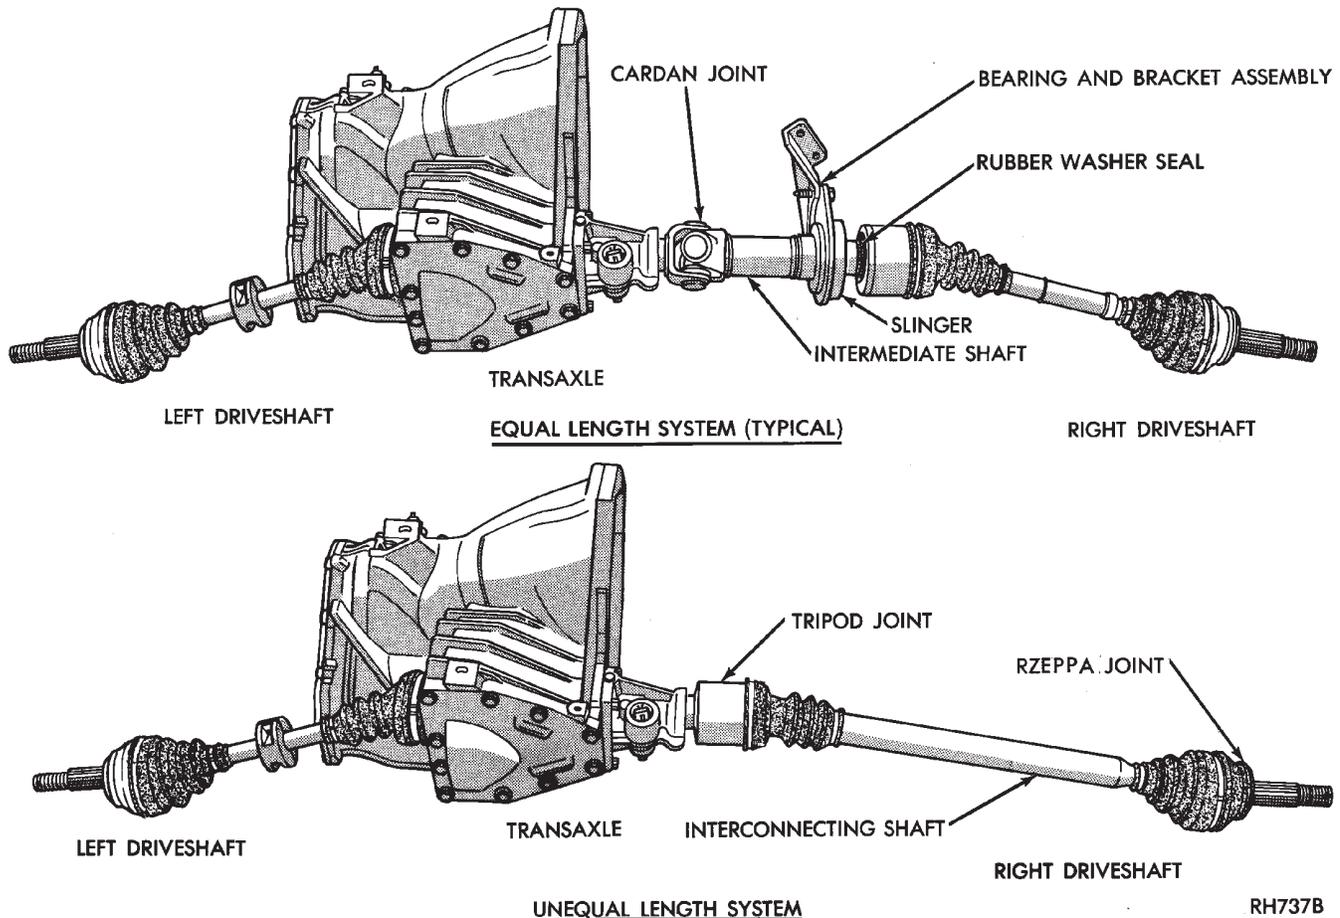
Front-Wheel-Drive Driveshaft Systems
